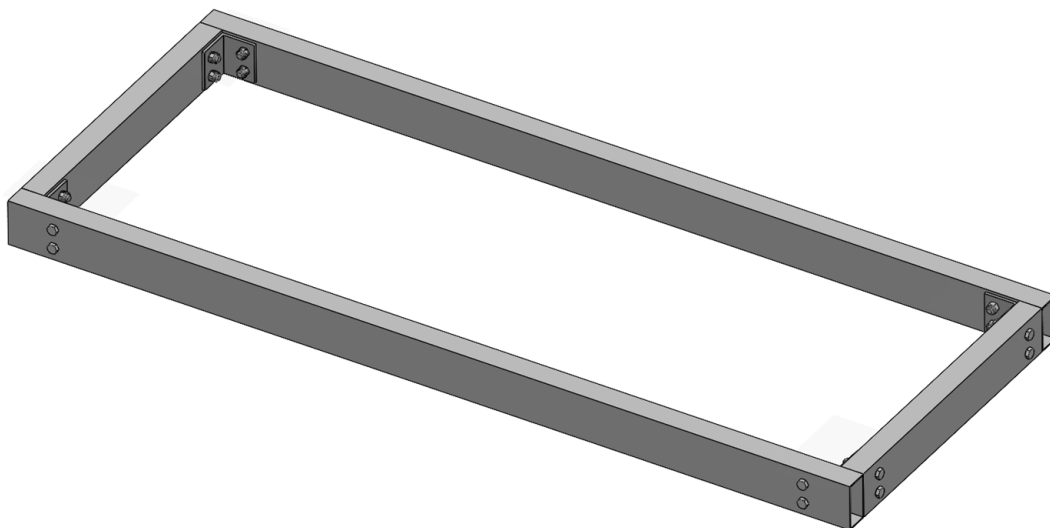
Example of a frame that can be mounted on a tow bar locking mechanism.
